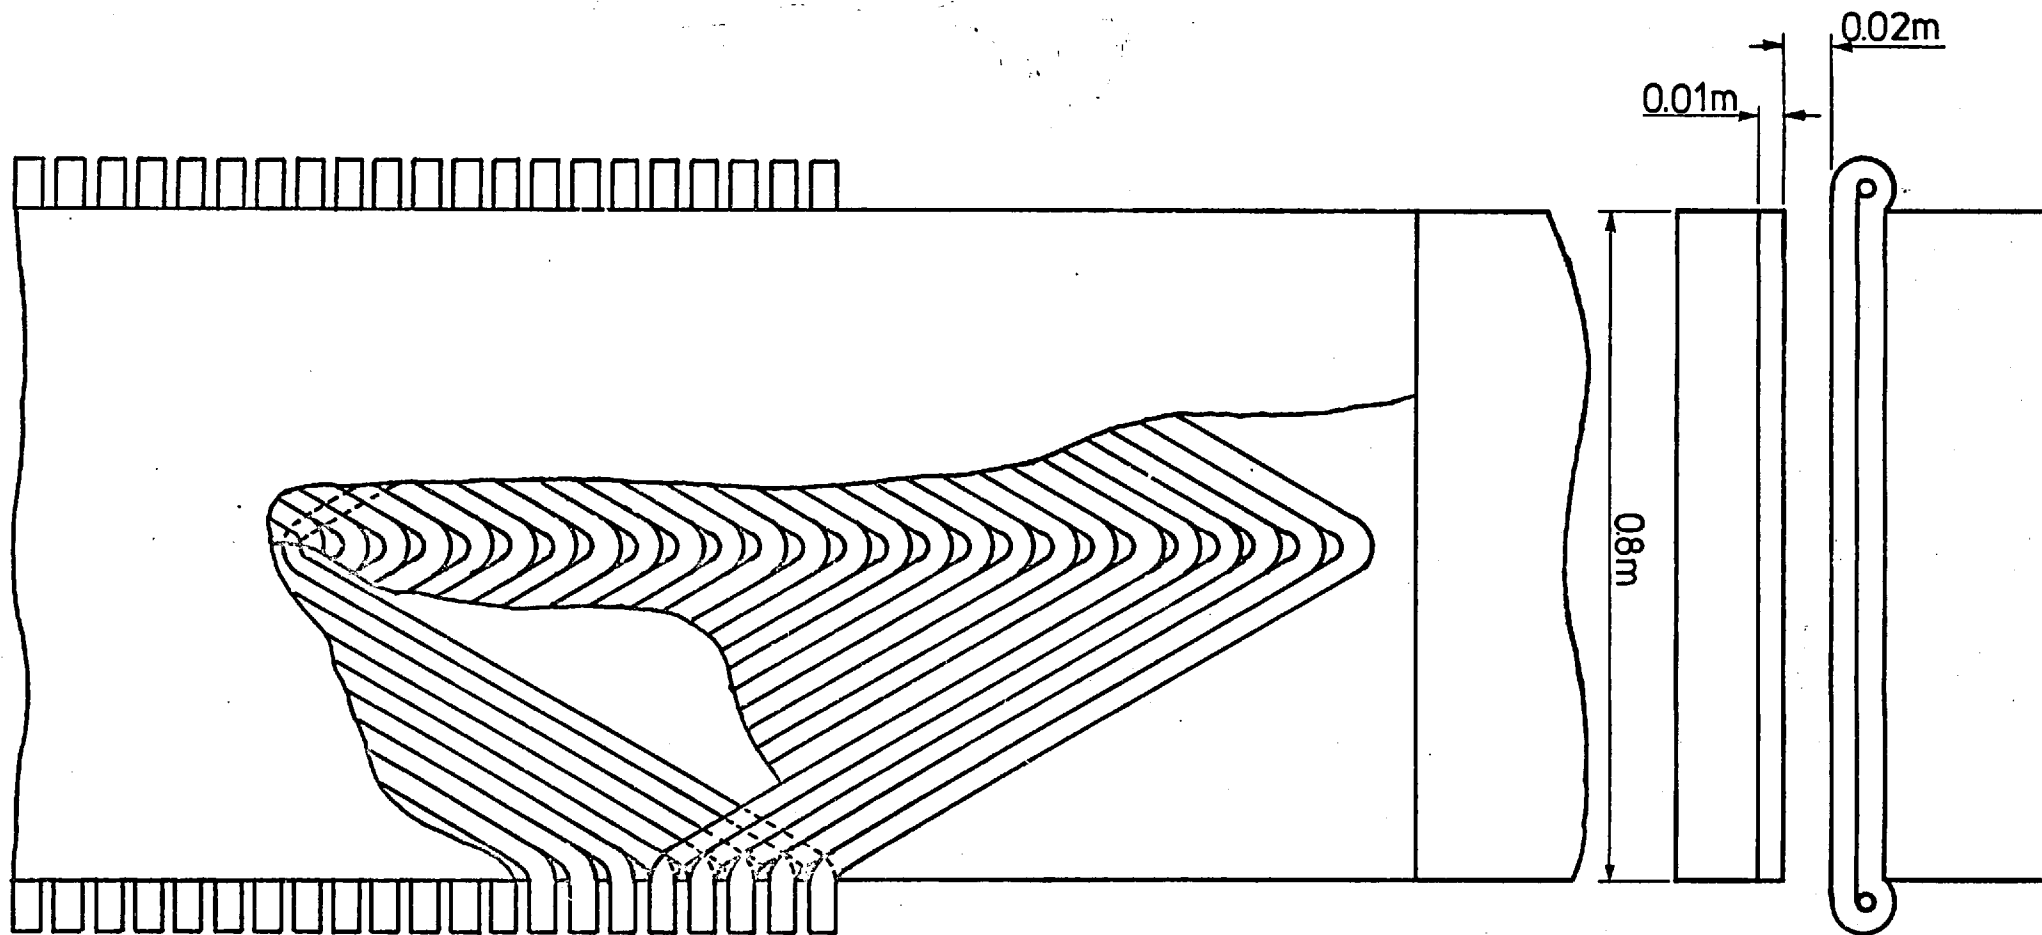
Arrangement of machine with skewed air-gap winding
